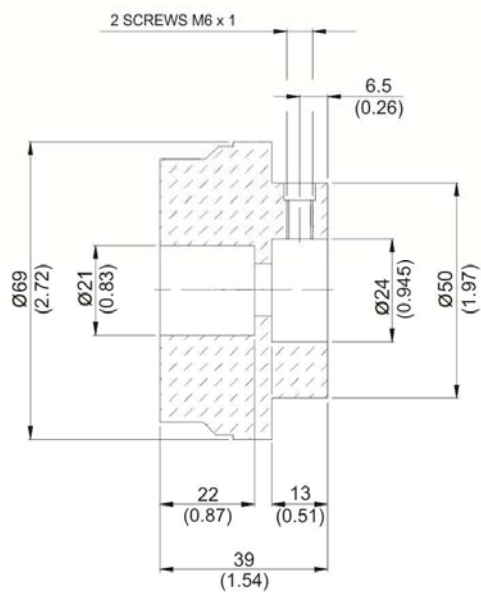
TP302 Dimensional Drawing / Magnets Dimensional Drawing
